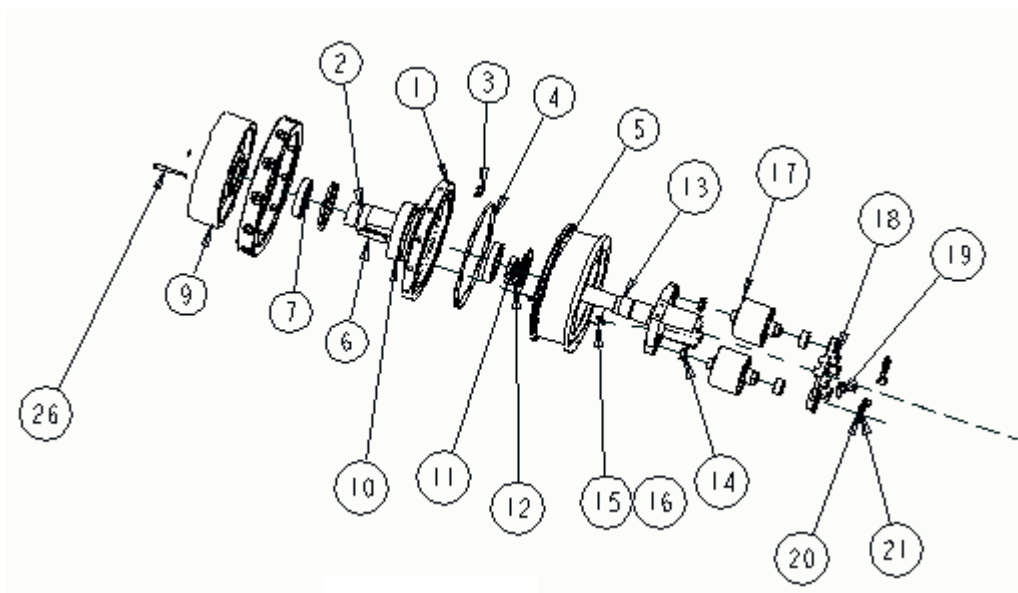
DISASSEMBE AND ASSEMBLE OF QUILL SHAFT MAIN SHAFT AND MAIN GEAR
